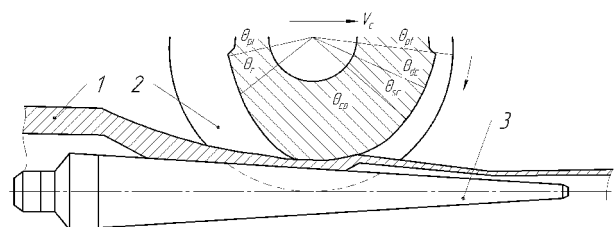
Scheme of the process of cold periodic roll rolling on a cold mill rolling mill:
